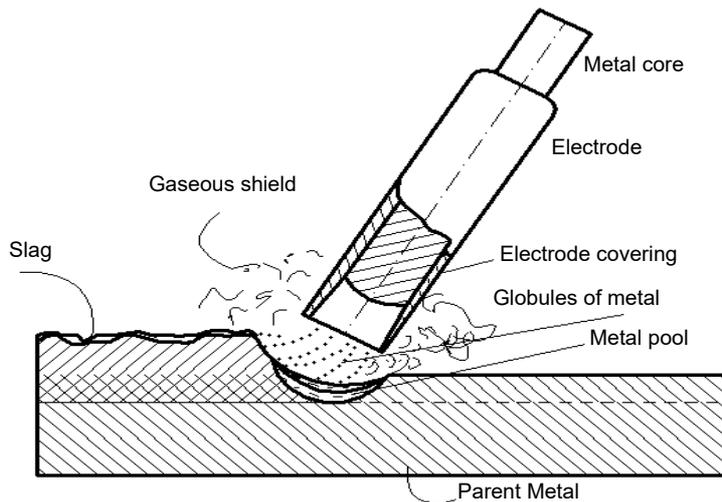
Detailed View of Flux-cored Arc Welding
